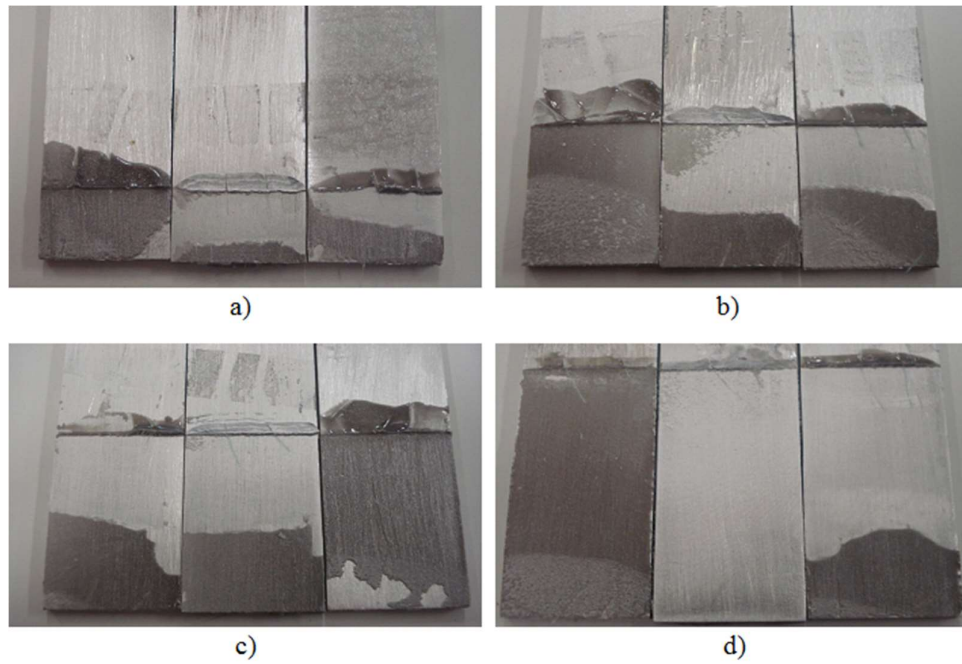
Failure modes of DLJ specimens bonded with the adhesive Araldite® AV138 : a) 12,5 mm, b) 25 mm, c) 37,5 mm and d) 50 mm.
